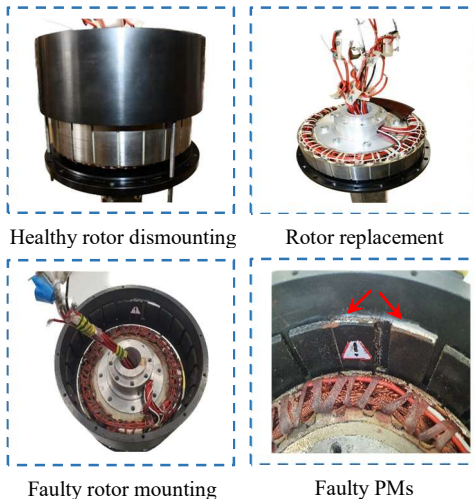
Faulty rotor mounting of ER-PMSM prototype.
